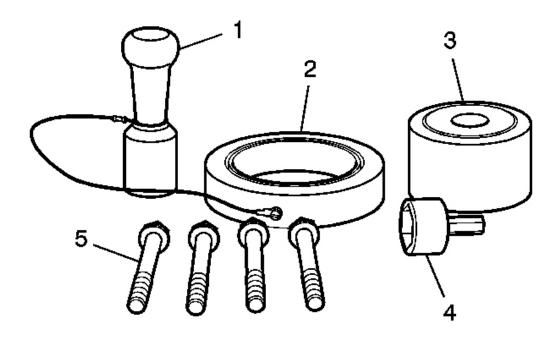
Cylinder Liner Trimming Tools View (2 Of 2) Courtesy of GENERAL MOTORS CORP.
